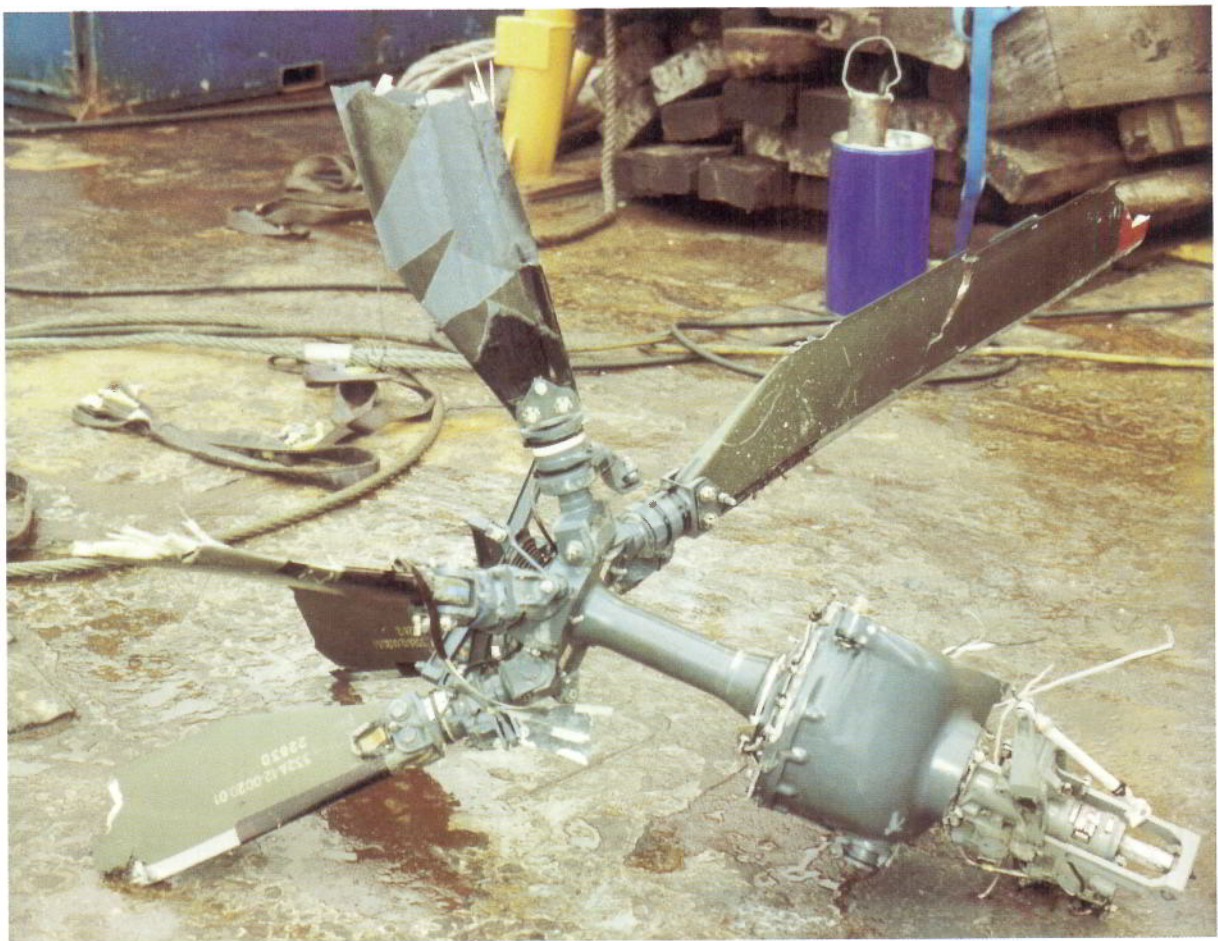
A: Showing recovered tail rotor, gearbox and pitch servo assembly, with 'White' blade root section uppermost.
